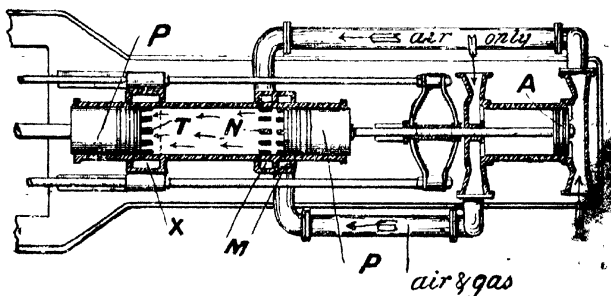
Two-stroke engine with double-piston mixture and exhaust control - Stirling, Oechelhauser, and Beardmore system.
